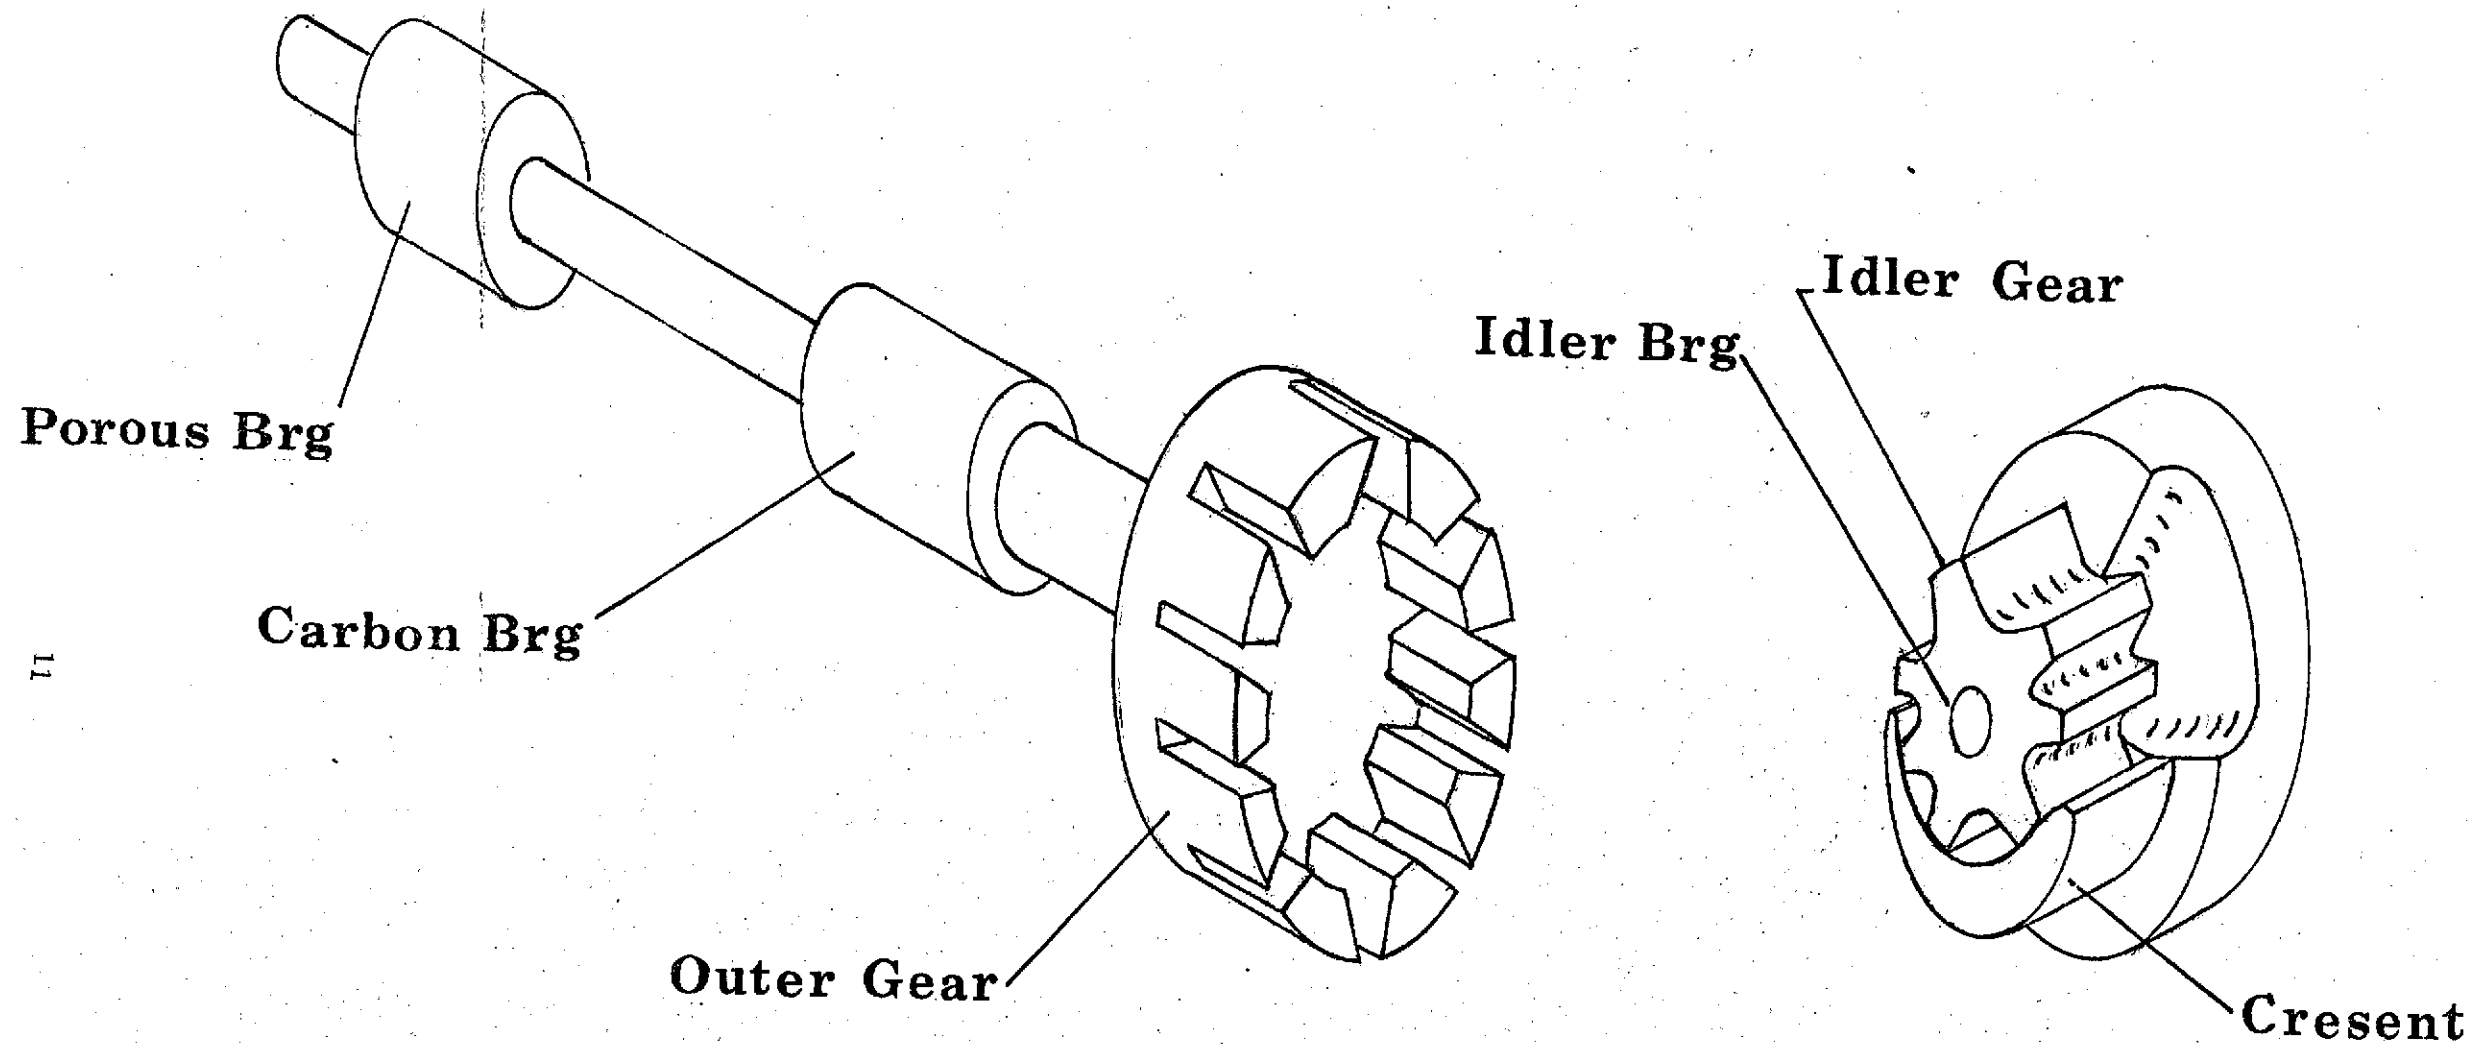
SCHEMATIC OF INTERNAL GEAR PUMP
